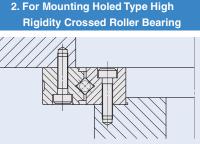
Example of direct mounting to the mating surface of Mounting Holed Type High Rigidity Crossed Roller Bearing
